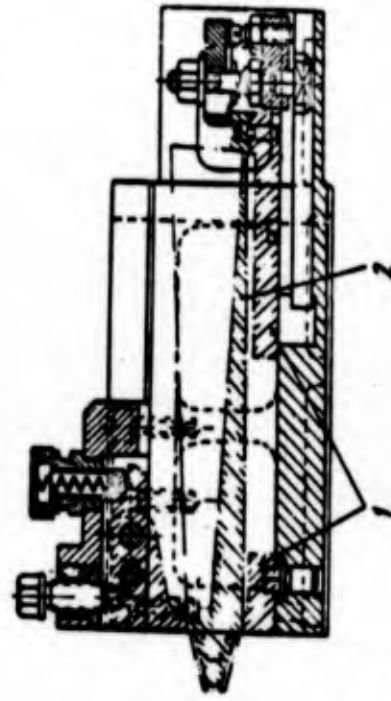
Unified holder for positioning blade during milling of root. 1) removable elements; 2) worked part.
